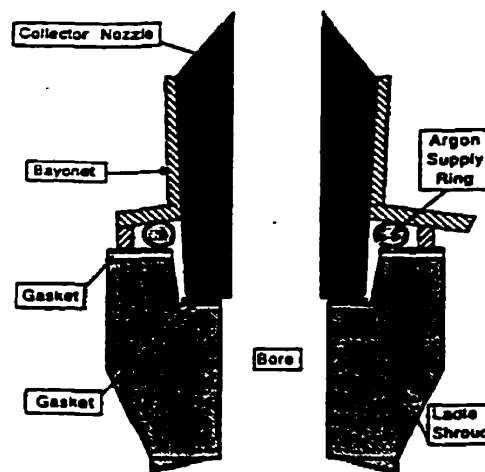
Argon bayonet device for shielding joint between ladle collector nozzle and ladle shroud; Schmidt *et al.*⁷⁴
